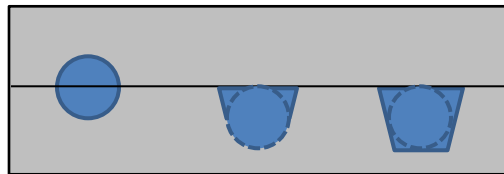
Full-round, parabolic, trapezoidal runner [1]
